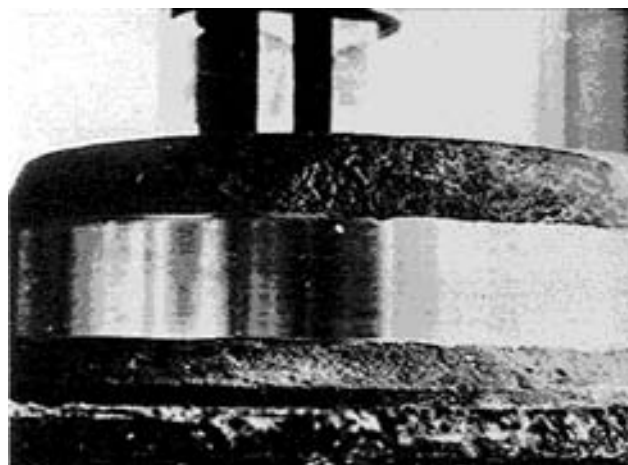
Fin shaft boss with Inconel alloy 625 weld overlay
